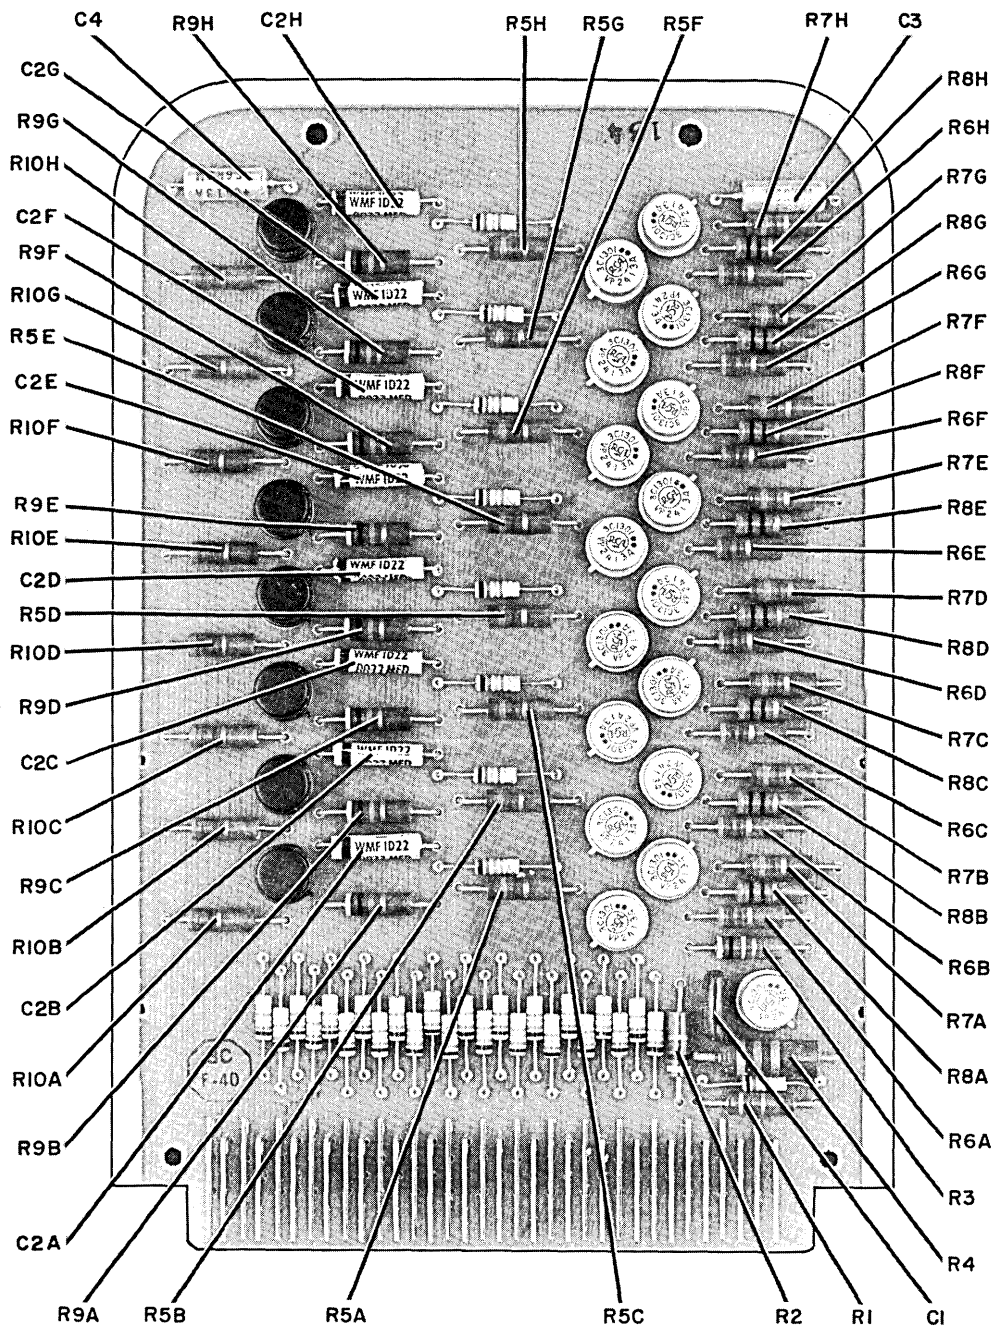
Inhibit Driver PAC, Model MI-32, Parts Location
